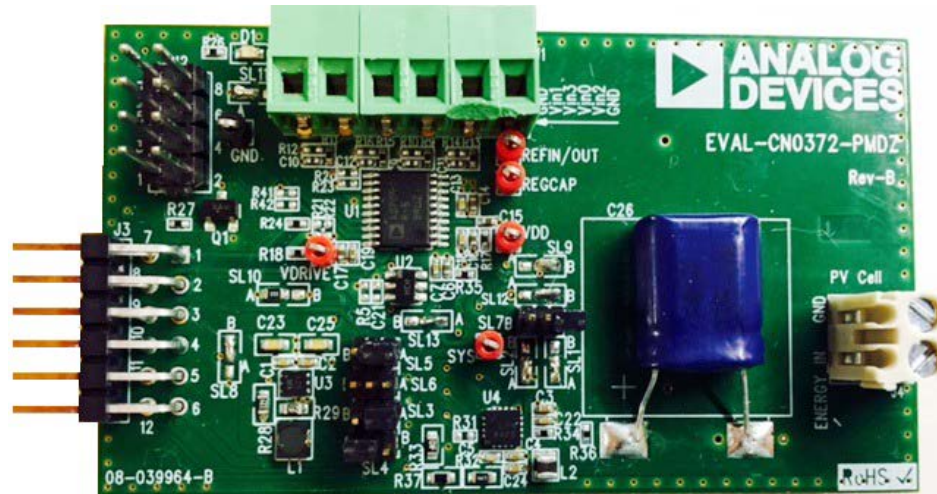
EVAL-CN0372-PMDZ PCB Photograph
